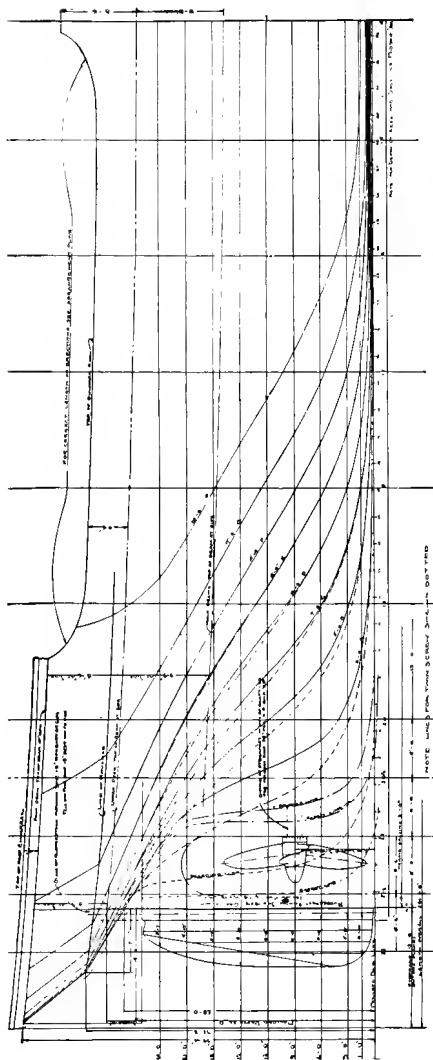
Standard Wooden Steamship—Sheer Plan—Moulded Lines—Stern.
